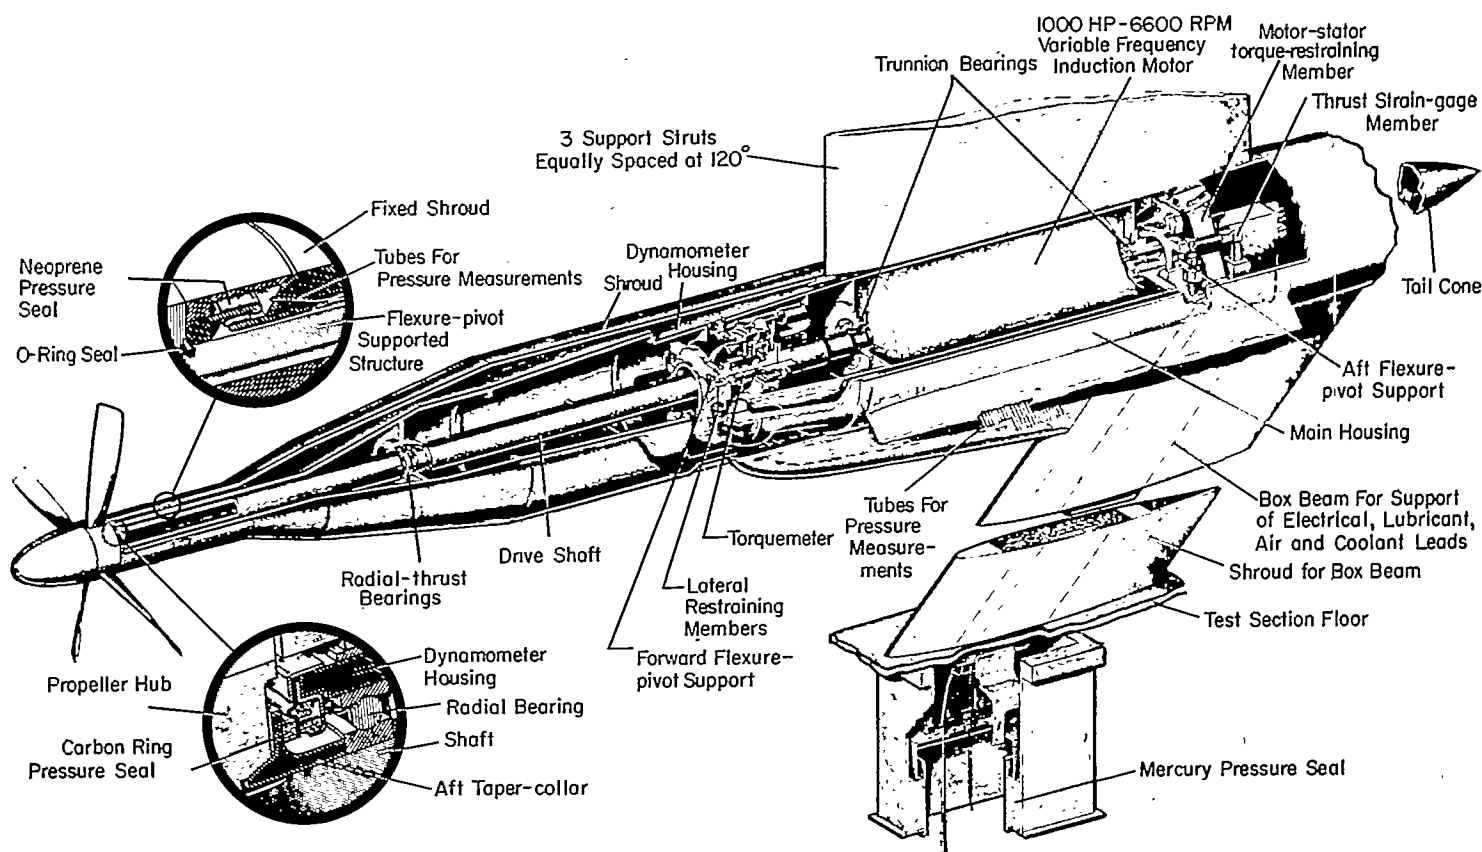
Cutaway view of the 1000-horsepower single-rotation propeller dynamometer.
